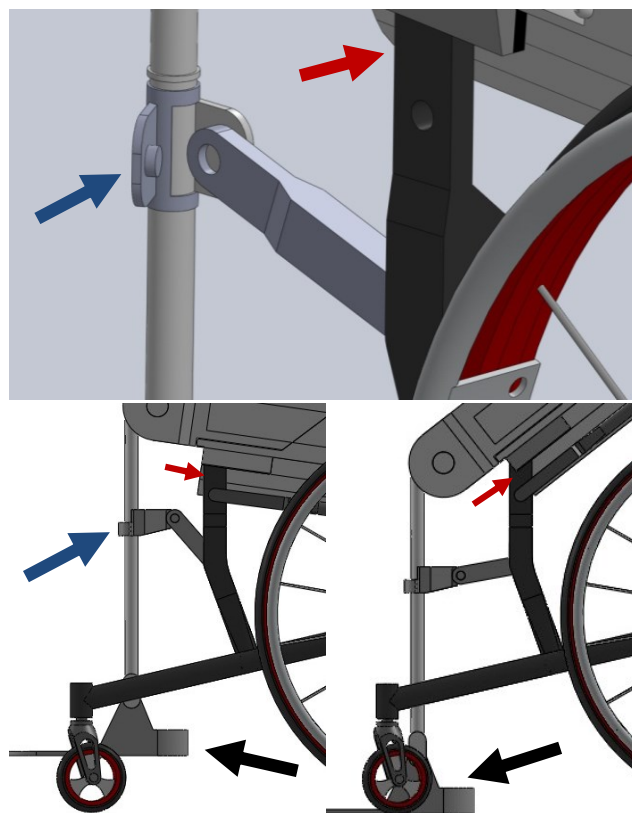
Design details for exoskeleton attachment to wheeled frame.
